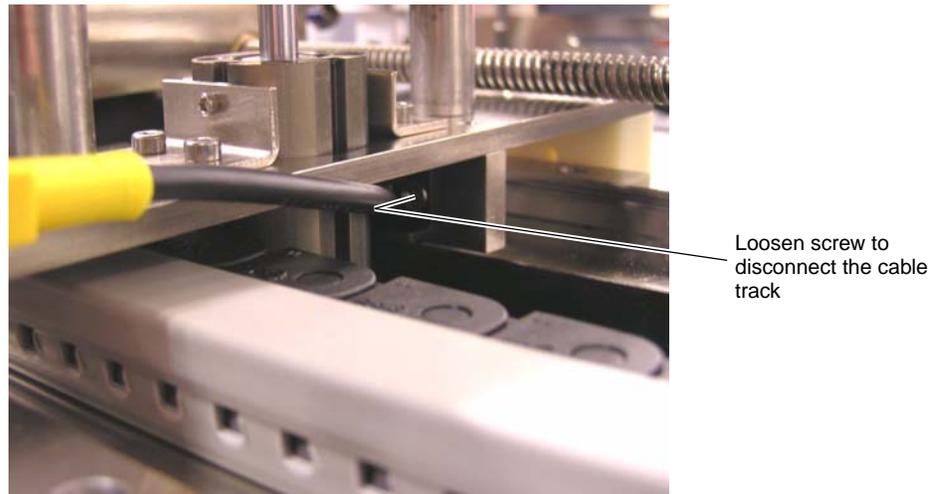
Cable Track Connection (Rear View of Panel Lifter)
